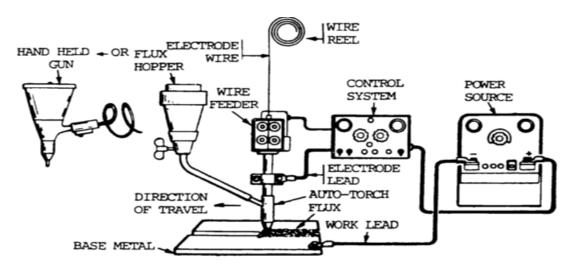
Equipments of Submerged Arc Welding. [H]
